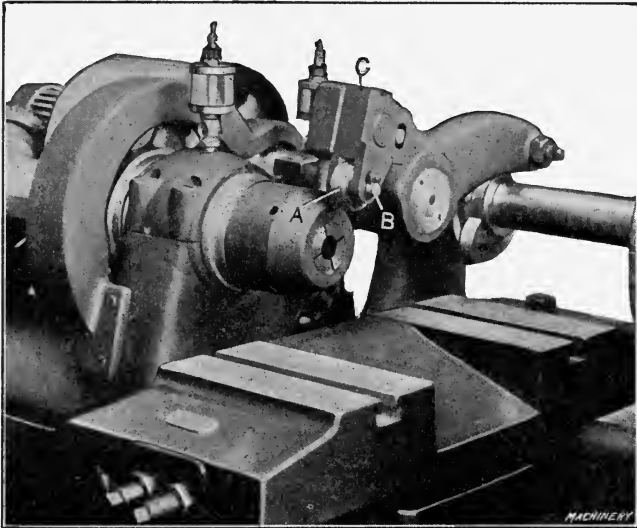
Thread-rolling Attachment Applied to Cleveland Automatic
